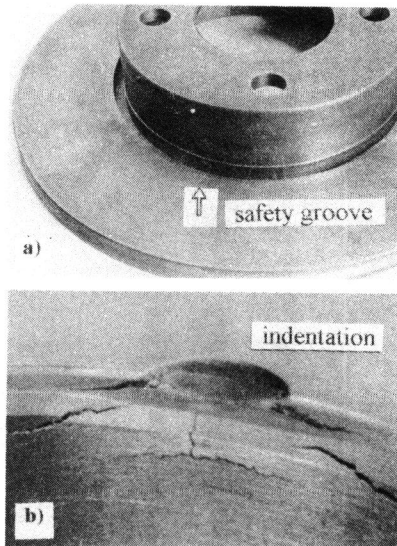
Fractured brake disk (a); crack system for safety groove (b)
